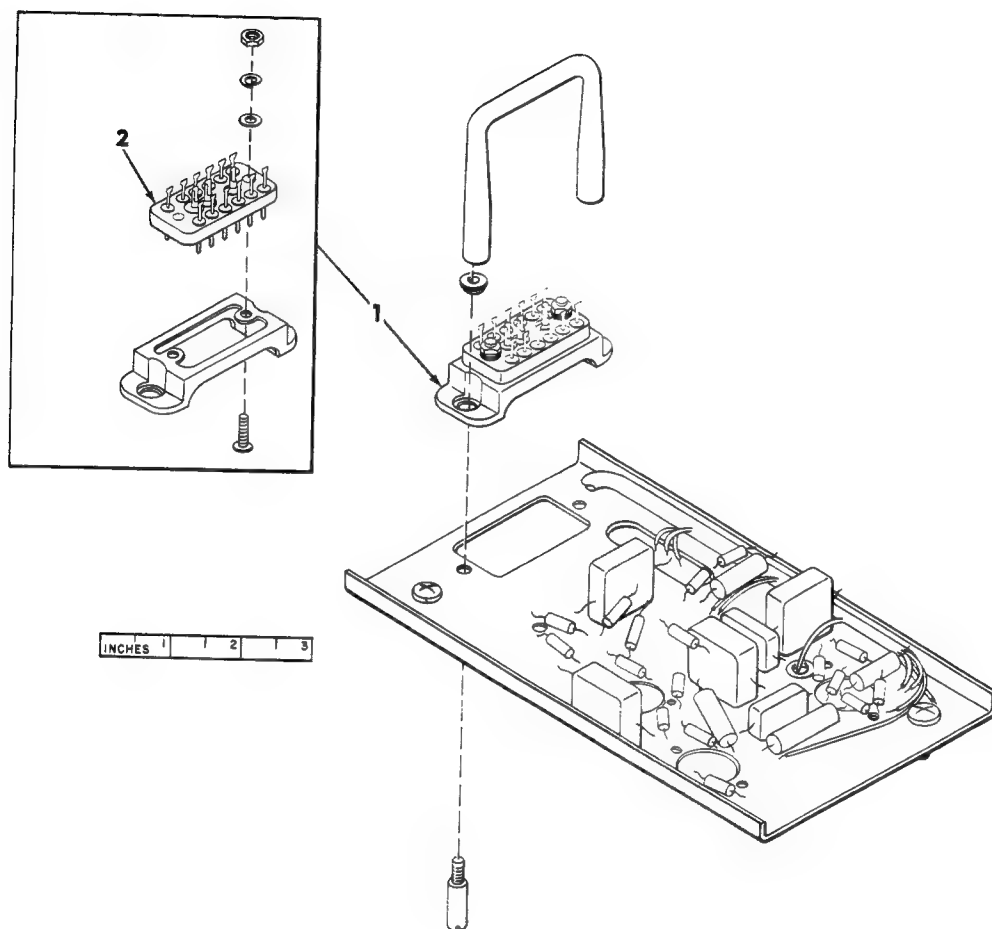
Switch assembly, telephone connecting (9005424)—exploded view
